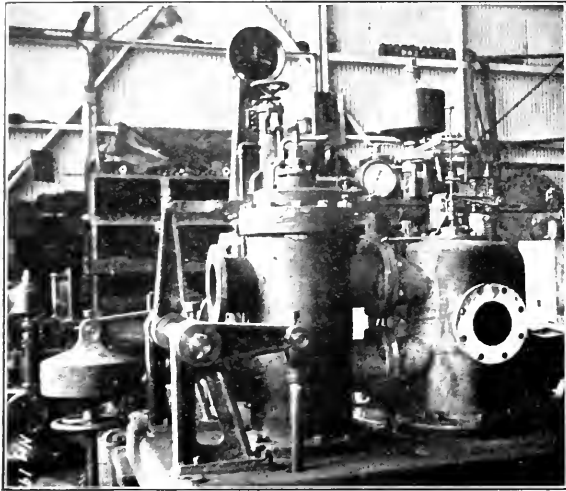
SHOP ASSEMBLY OF GOVERNOR
